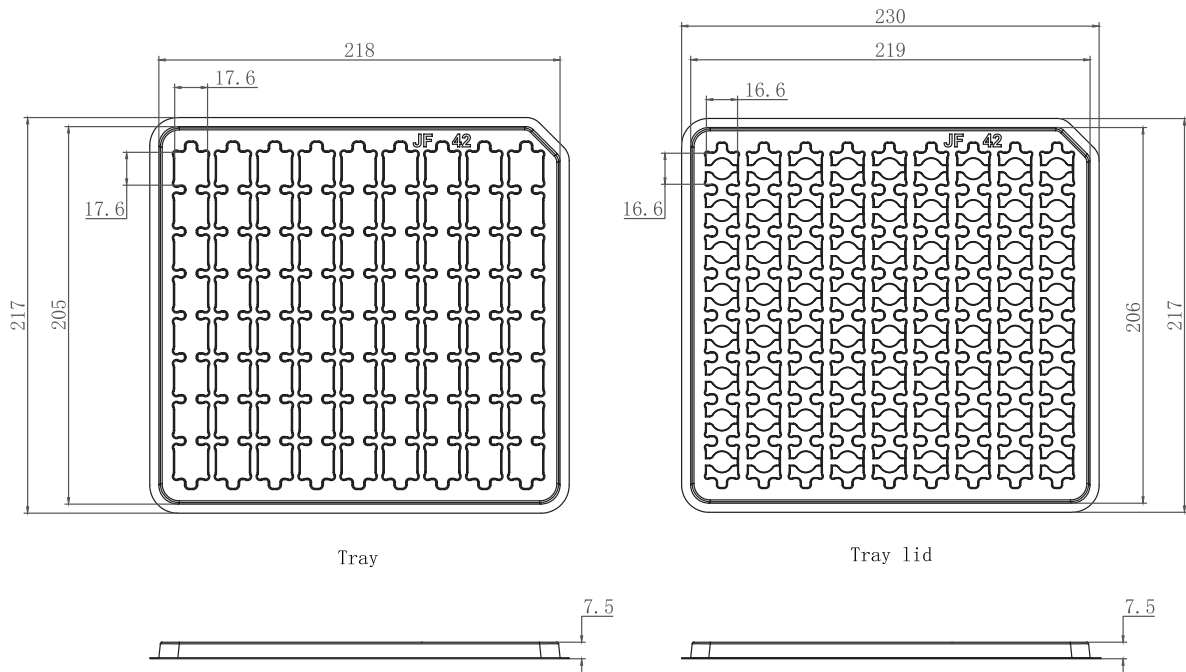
Tray dimensions for L2C4-xxxxxM02F0900 and L2C4-xxxxxM03F0900.
